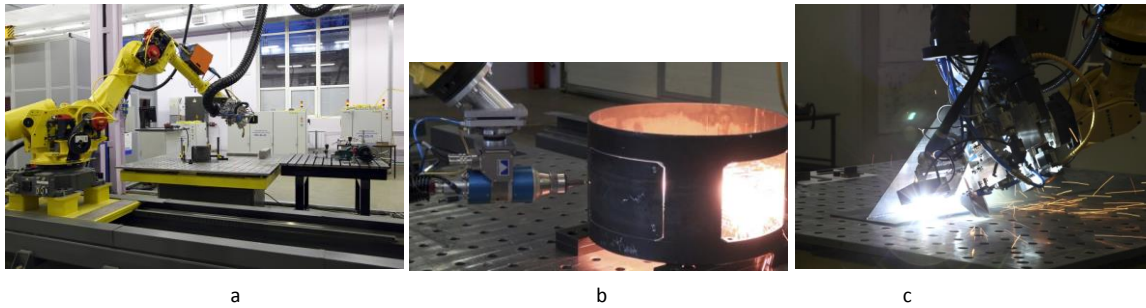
Robotized complex for laser welding and cutting in various spatial positions: (a) general view of the complex, (b) 3D-laser cutting, (c) hybrid laser-arc welding process
